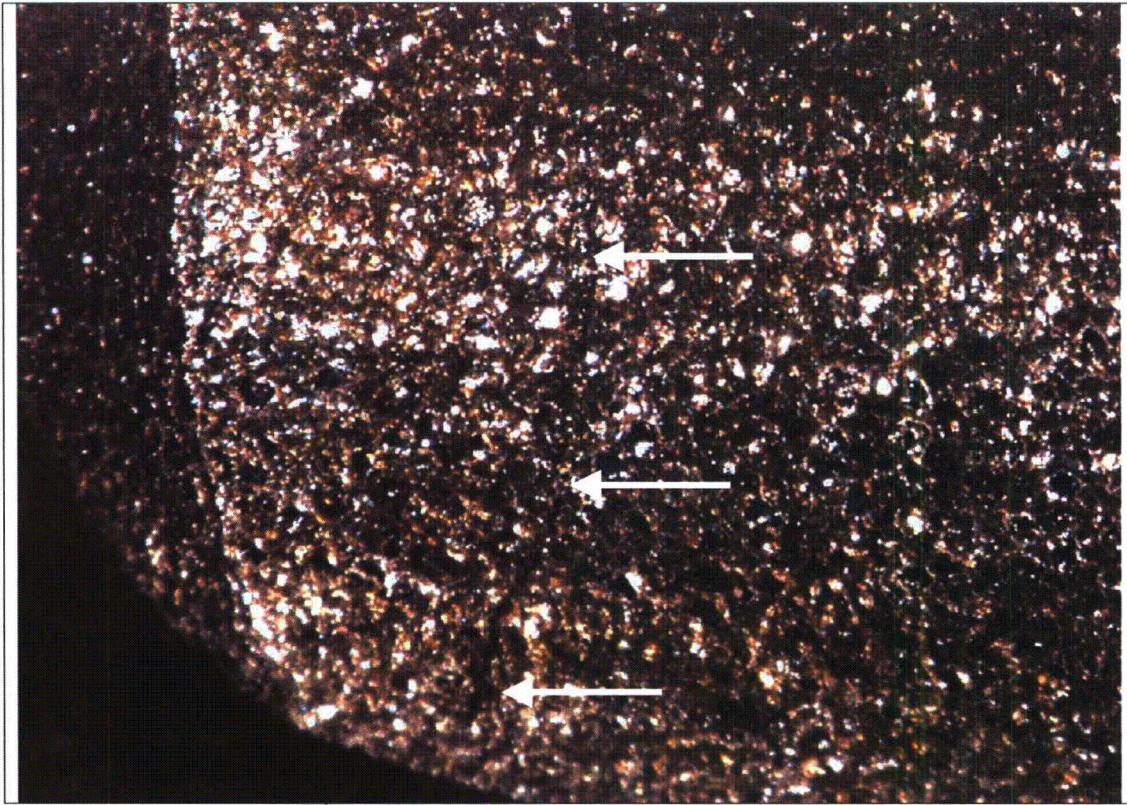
A stereoscope photo showing the axial crack on the EDM cut surface. (17x Magnification)
